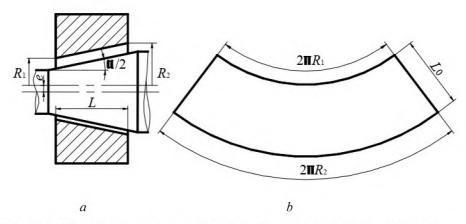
Conical plain sliding bearing: a – calculation scheme; b – unfolded bearing surface
